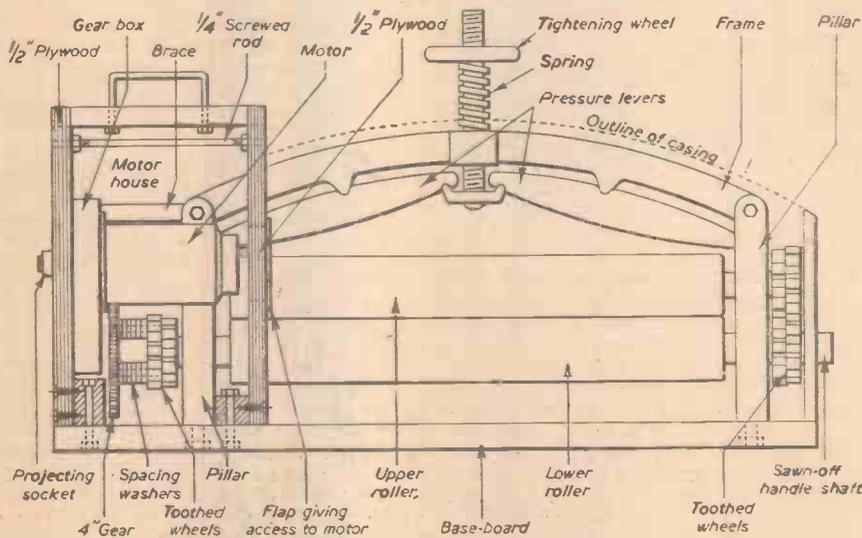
Combined front elevation of wringer and section through motor house assembly.
